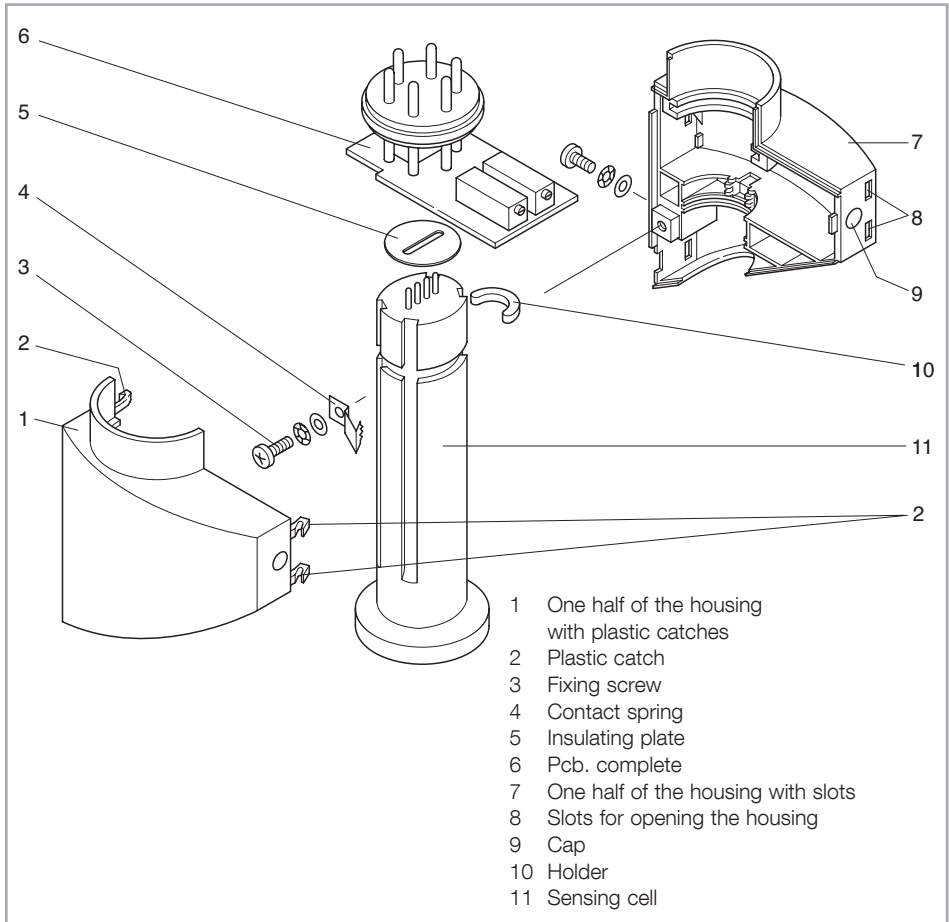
Disassembled TR 211 / TR 212 / TR 216 gauge head
